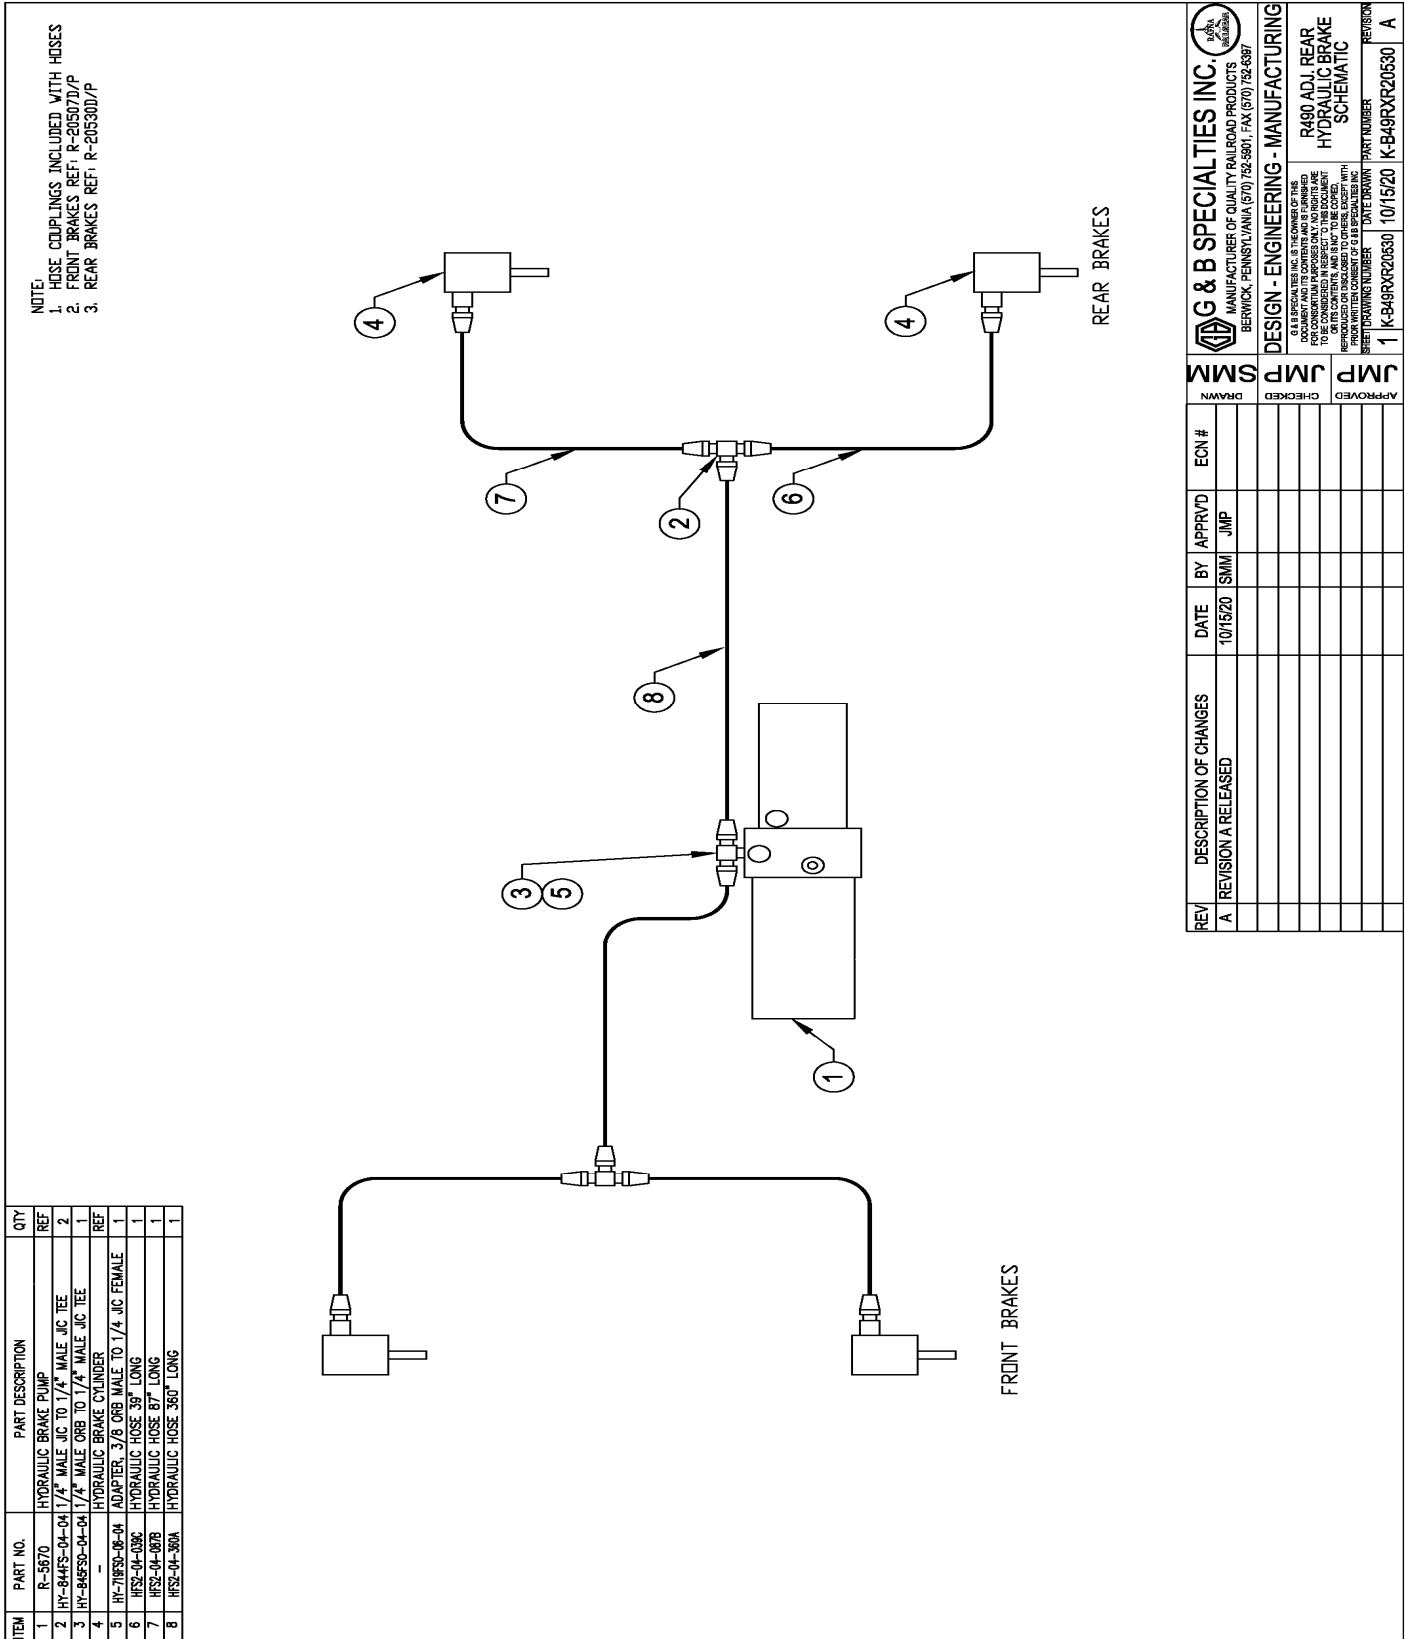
Adjustable Rear Brake Hydraulic Schematic
